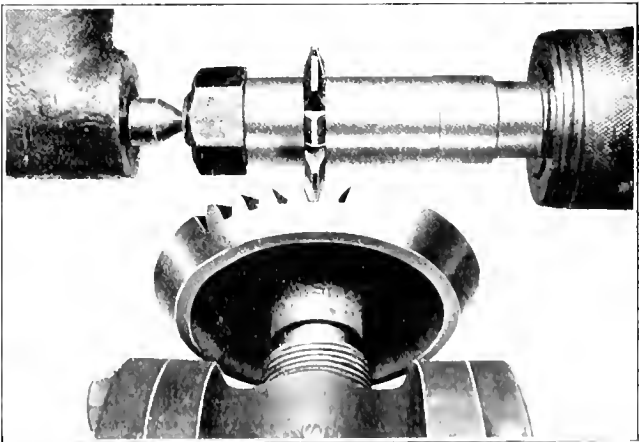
Cutter Completing the Tooth, showing Widened Tooth Space
